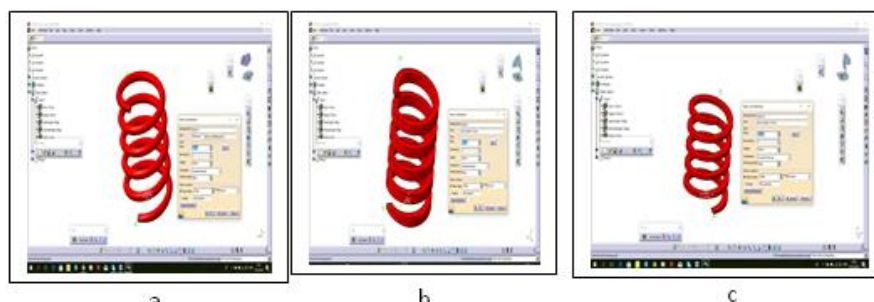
Construction of the three types of helical springs: a - circular section; b - square section; c - rectangular section
